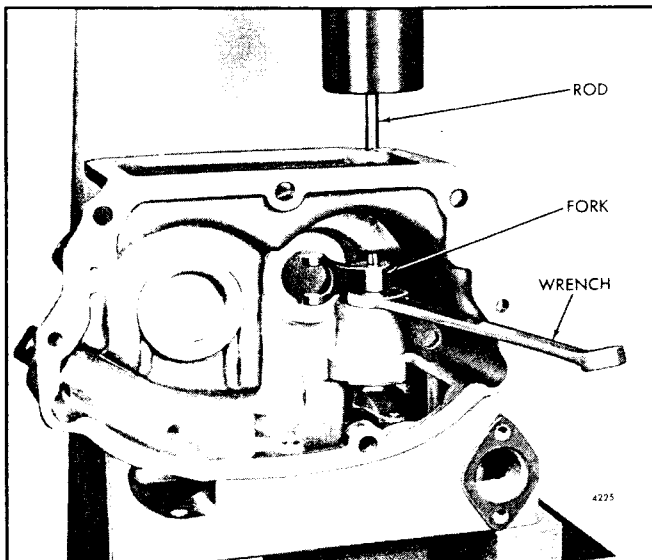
Removing Governor Operating Fork from Operating Shaft and Bearing Assembly
